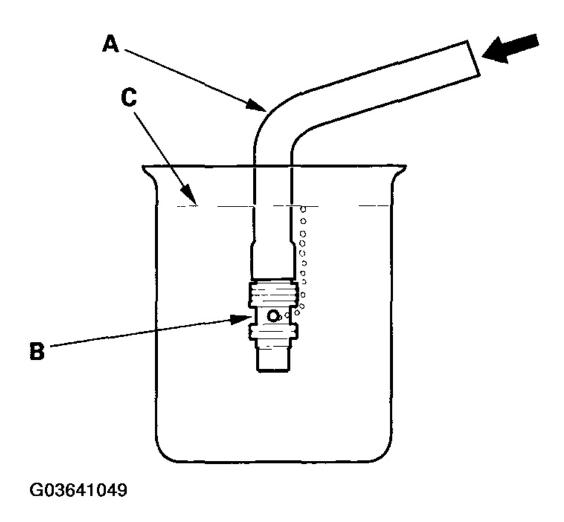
Attaching Hose To End Of Flow Control Valve Courtesy of AMERICAN HONDA MOTOR CO., INC.
